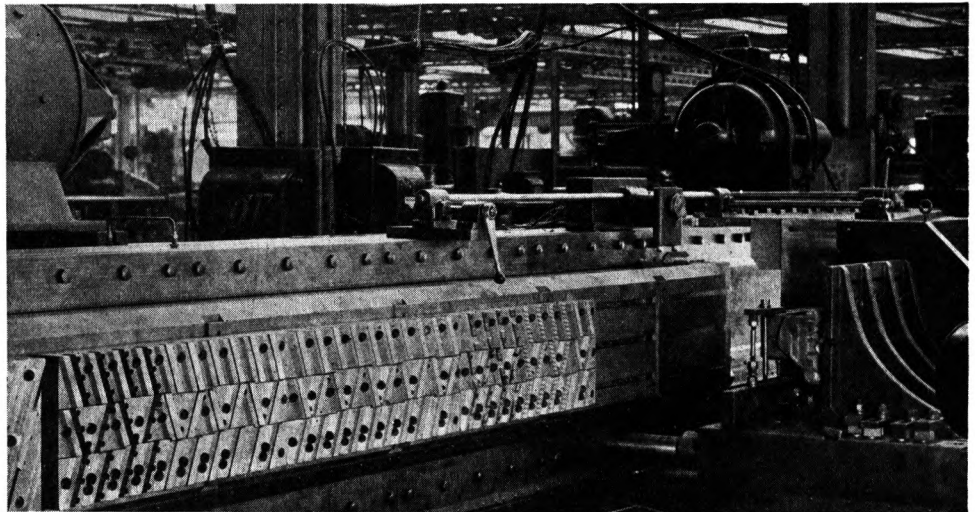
LARGE, HORIZONTAL BROACHING MACHINE FOR FINISHING THE ENTIRE TOP OR BOTTOM SURFACE OF CYLINDER BLOCKS IN ONE PASS OF THE BROACH
